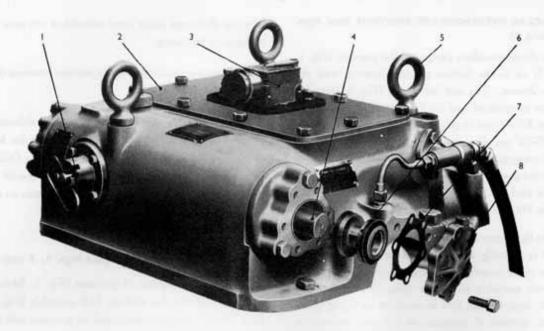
VIEW OF TOP PORTION OF CASE AND PISTON
